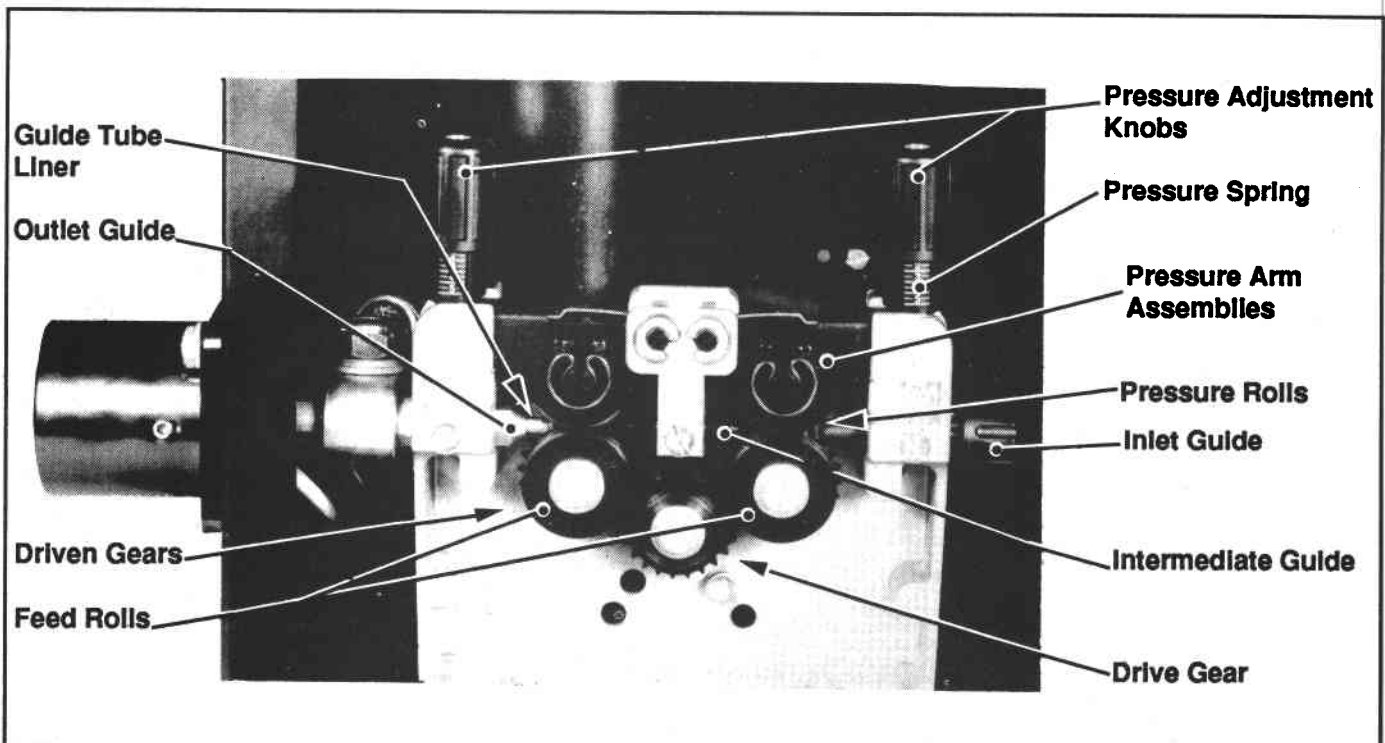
TM 4 x 4 Tacho Feed Roll Assembly
